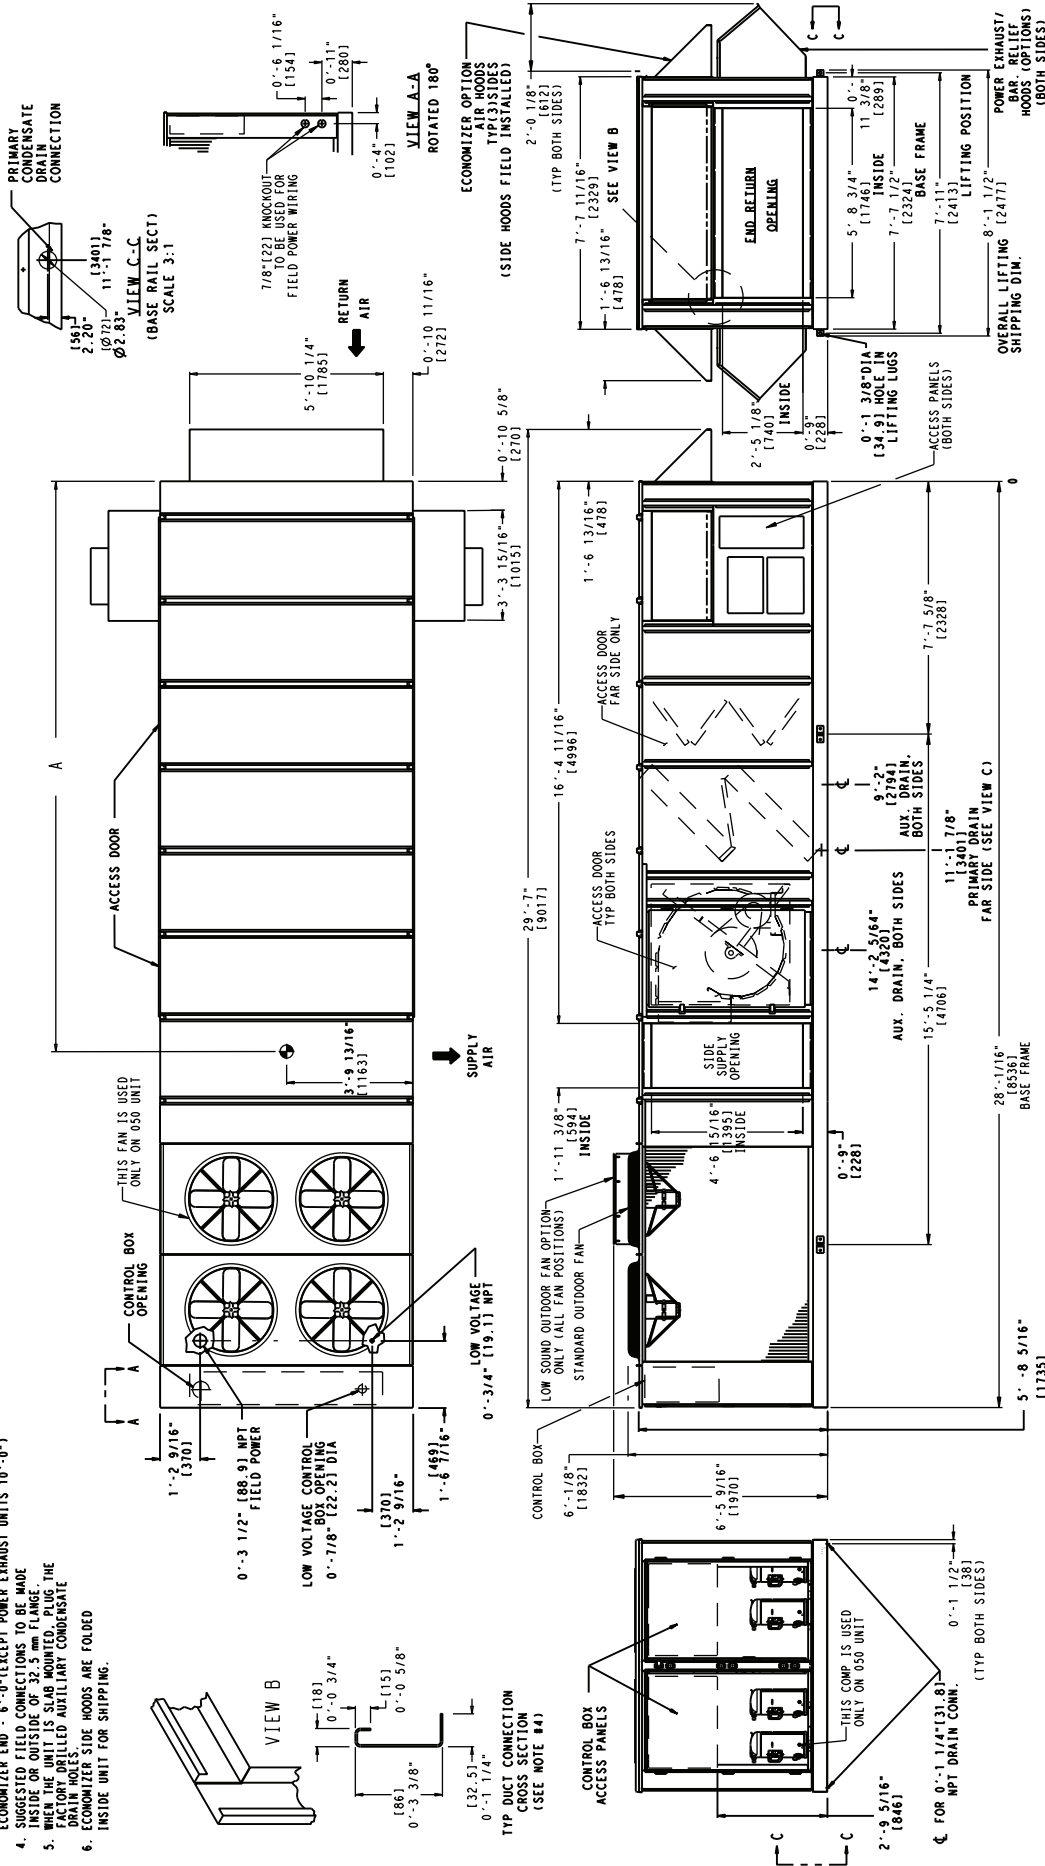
Base Unit Dimensional Drawing — 50P4, P5040-050 (Standard Chassis Unit Shown)
